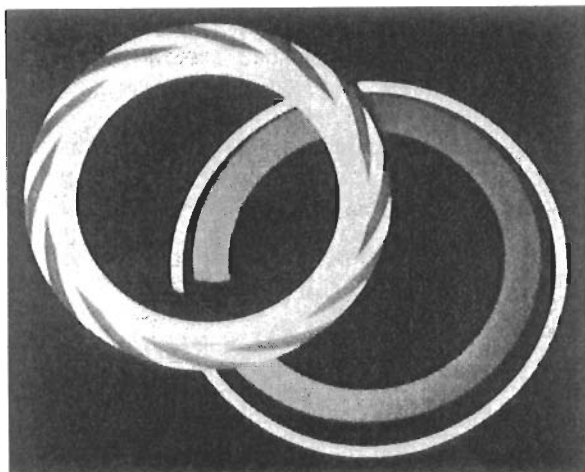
Dry gas seal mating ring for counter-clockwise rotation, shown on primary ring. (Courtesy of John Crane Inc., Morton Grove, Illinois.)
